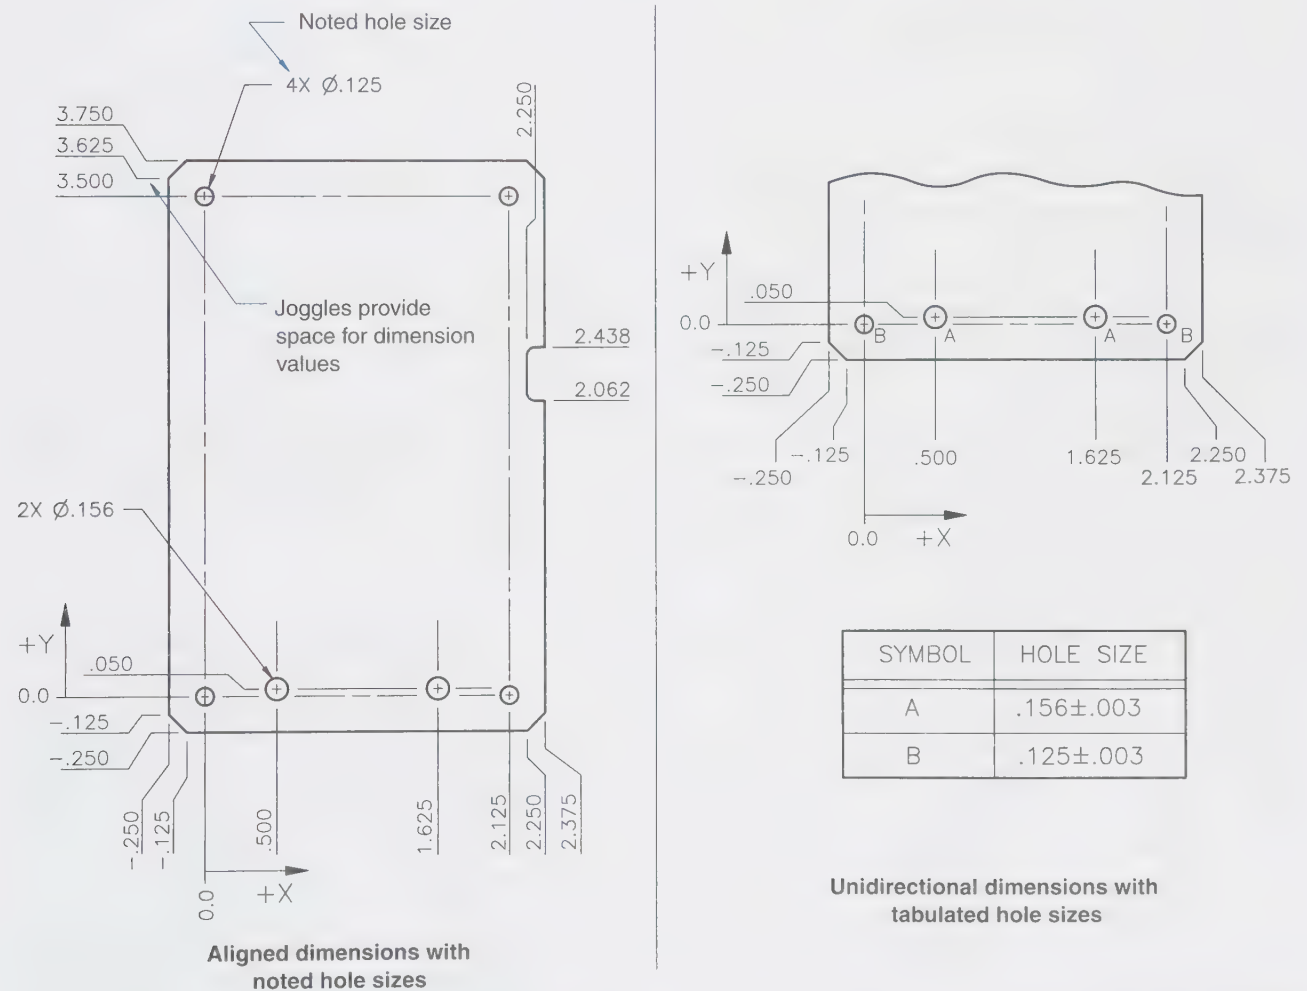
Rectangular coordinate dimensioning without dimension lines shows the dimension values near the ends of the extension lines.
